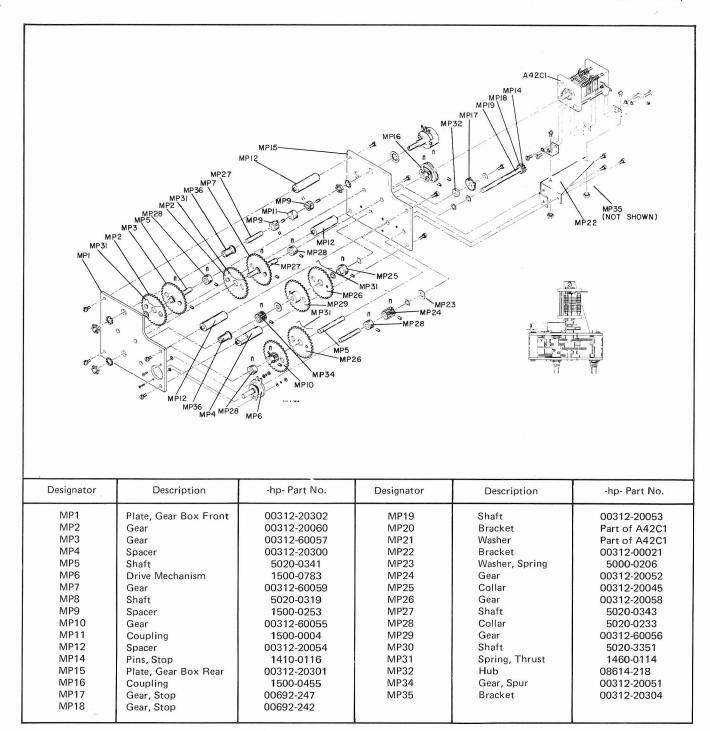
312B/D Frequency Drive Assembly, A42, Exploded View.
